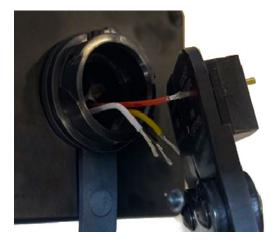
Auxiliary wires fed through panel mount housing with bottom three wires bent out of way
